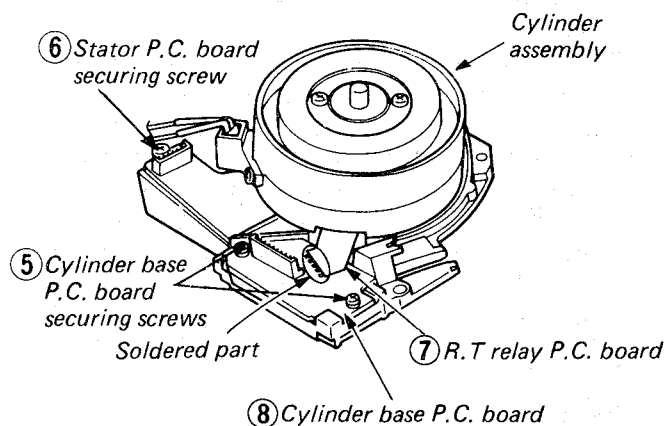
Relay P.C. board and cylinder base P.C. board
